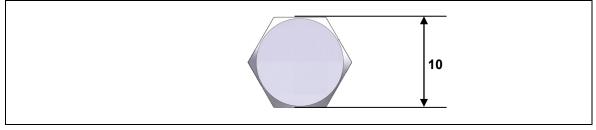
Diagram of the hexagonal shaft (dimensions in mm)
